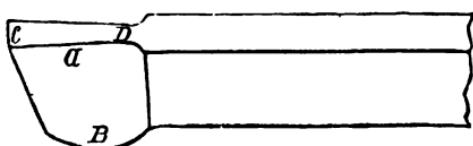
represents a tool for cutting an outside V thread in brass work. When, however, the tool point must, of necessity, stand far out from the tool post, it must be given negative top rake, to make it cut smoothly and prevent its jarring. To adapt this tool to cutting V threads on iron, it is only necessary to give it top rake.
